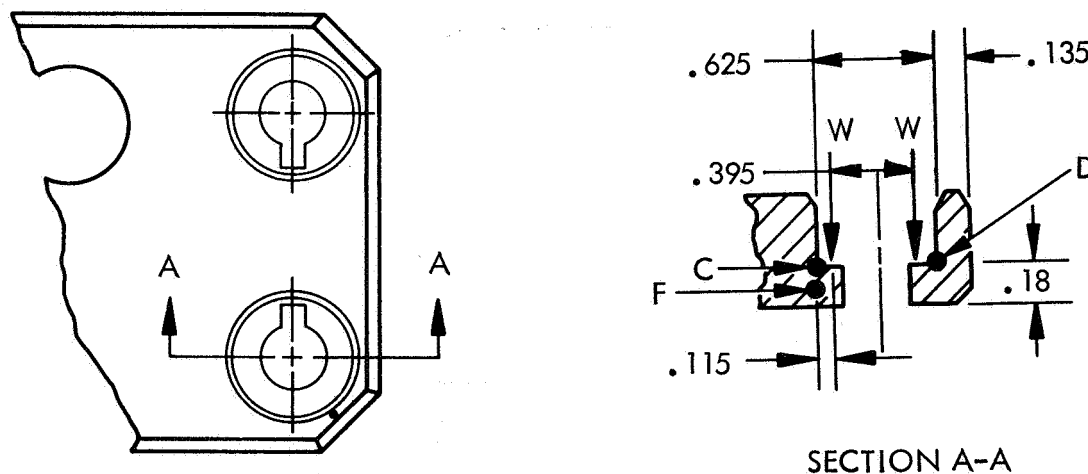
Section of Bracket at Bolt Attachment Holes
